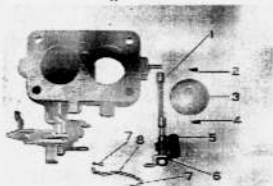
Disassembling Secondary Throttle Valves 01913
